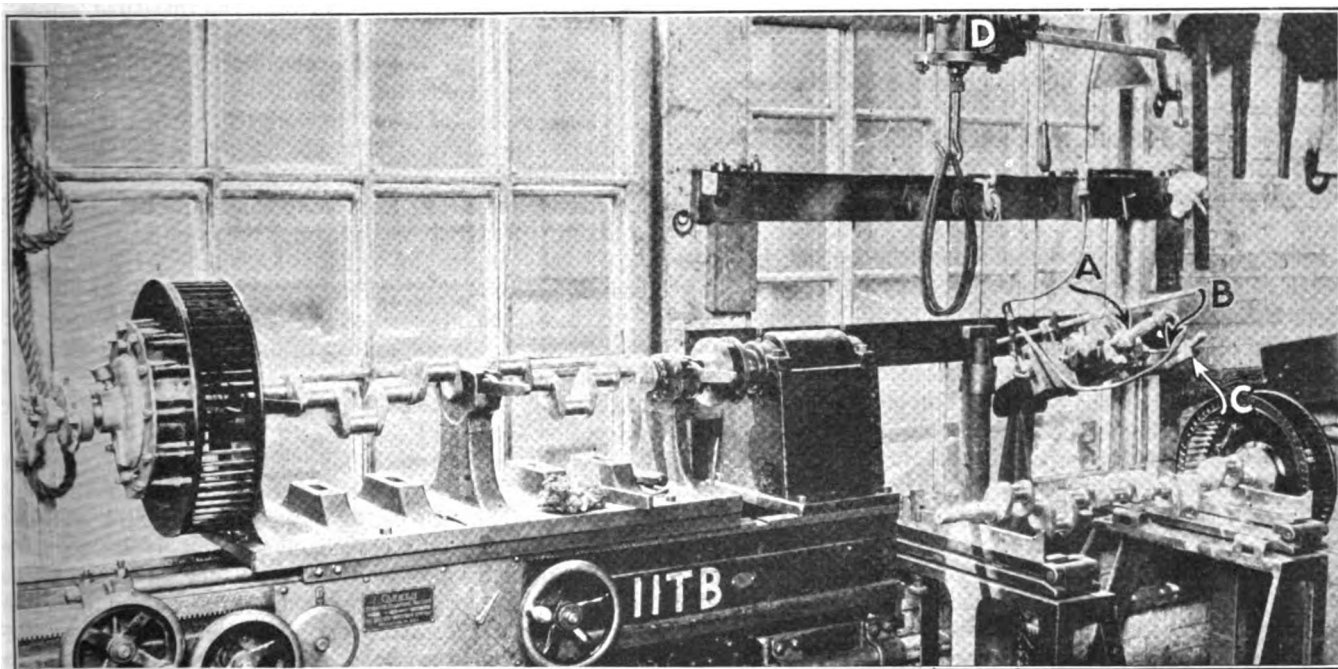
STATIC AND DYNAMIC BALANCING OF COMPLETE CRANKSHAFT
